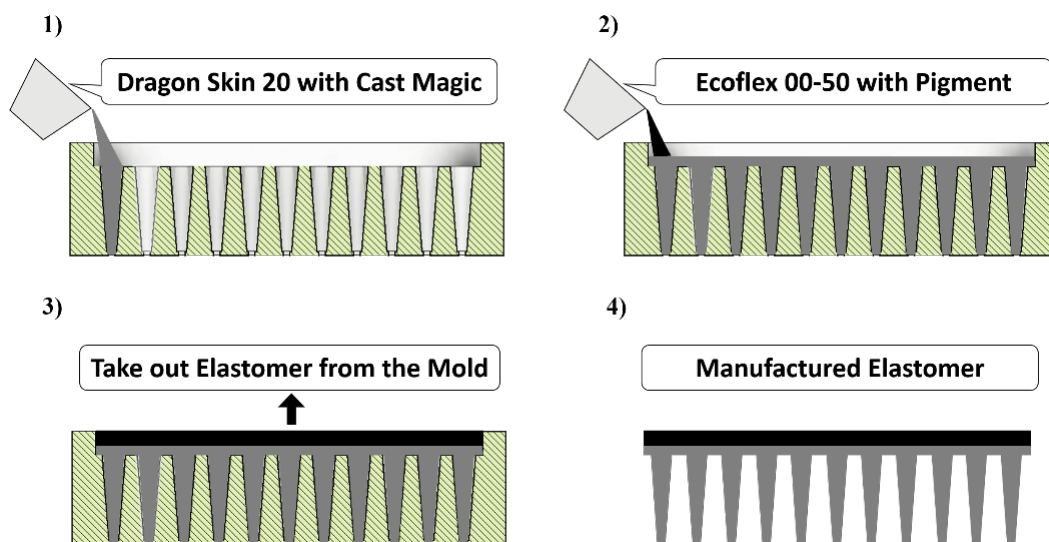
The fabrication process of the elastomer component. Firstly we pour the mixture of Dragon Skin 20 with Cast Magic into the pin slots within the mould. Then we pour the mixture of Ecoflex 00-50 with black pigment into the rest space of the mould. Finally, we take out the manufactured elastomer component.
